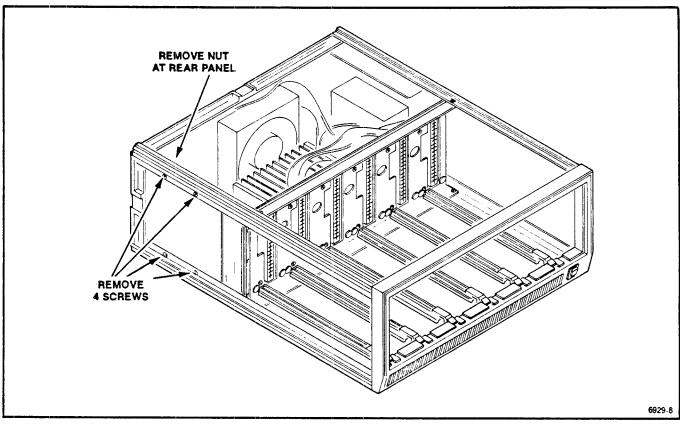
Location of screws holding the dc power supply circuit board to the mainframe chassis.
